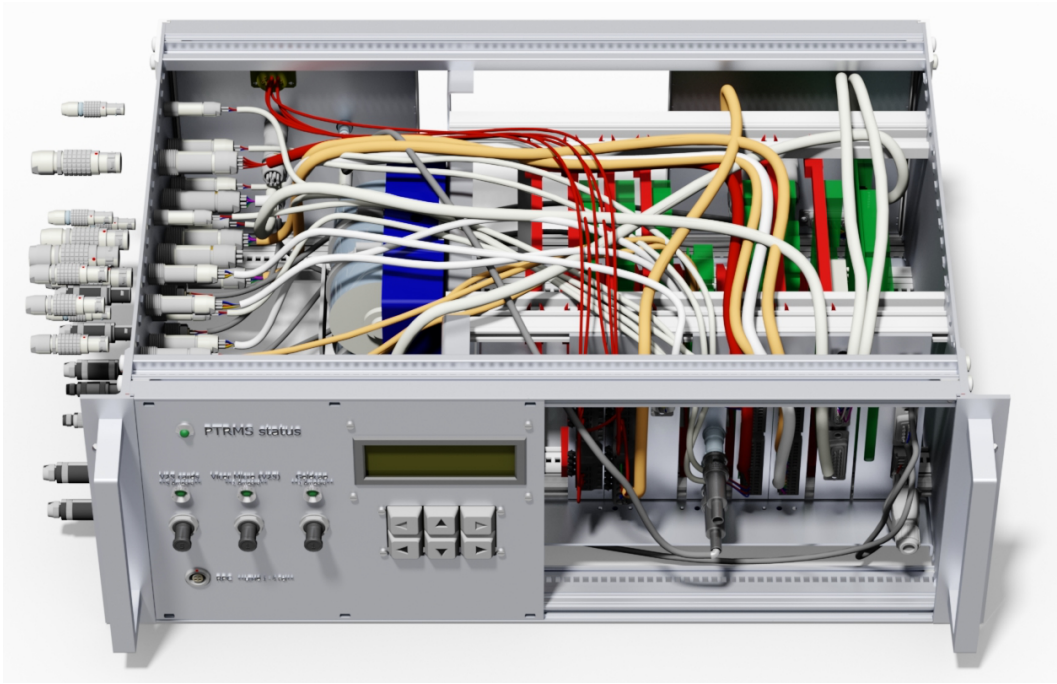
CAD drawing of the modified electronics subrack used in the new PTRMS-CARIBIC. Please note that the picture is not complete. Some parts and accessories are missing to give a better insight, e.g. the missing front panel enables the view at the I/O interface of the V25 control system. The main unit comprising e.g. the V25 microcontroller and the memory card slot is installed on the very right. The individually combined I/O modules are mounted to the left of it. The majority of their inputs and outputs is connected by cable with the sockets on the left exterior side of the subrack. Image courtesy of Simon Heger (KIT).
